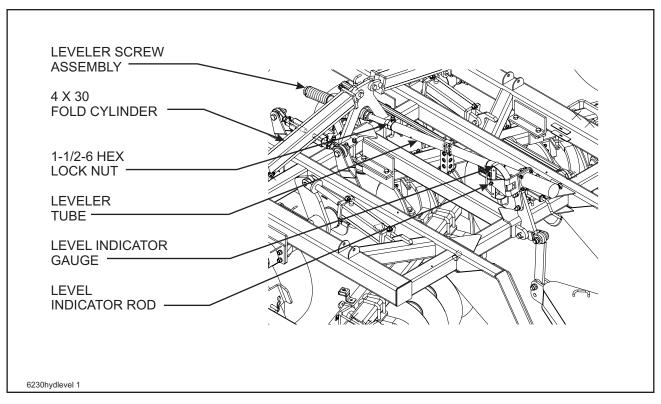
Hydraulic Leveler Gauge Adjustment
